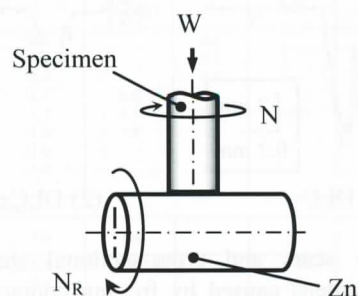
Method used for Zn coating on the side surface of the specimen.
